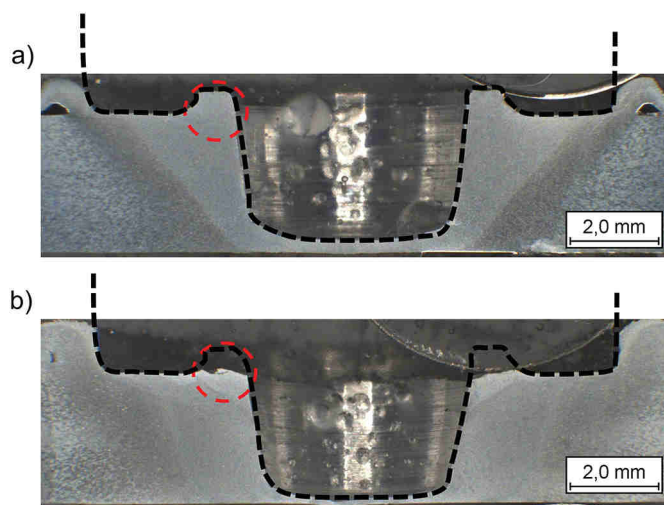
Shoulder-pin edge zones analysis from AA6082-T6 cross-sections view: a) 1000 rpm, b) 2400 rpm.
